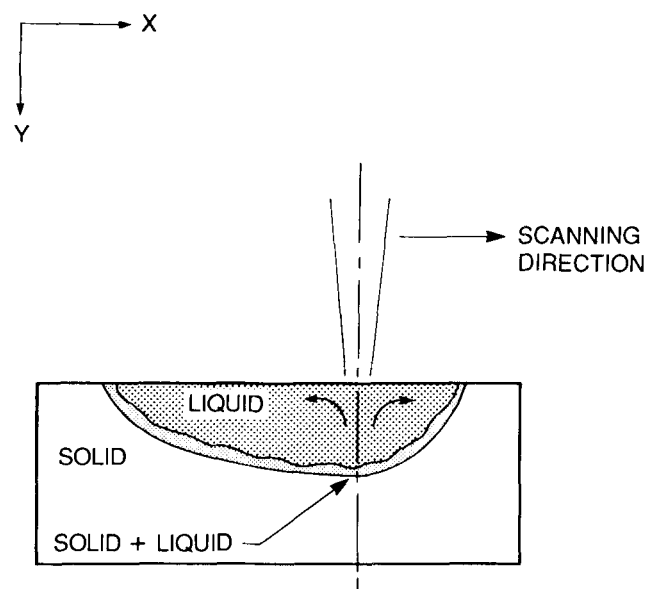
Schematic drawing of the laser welding process, indicating the region of interest.
